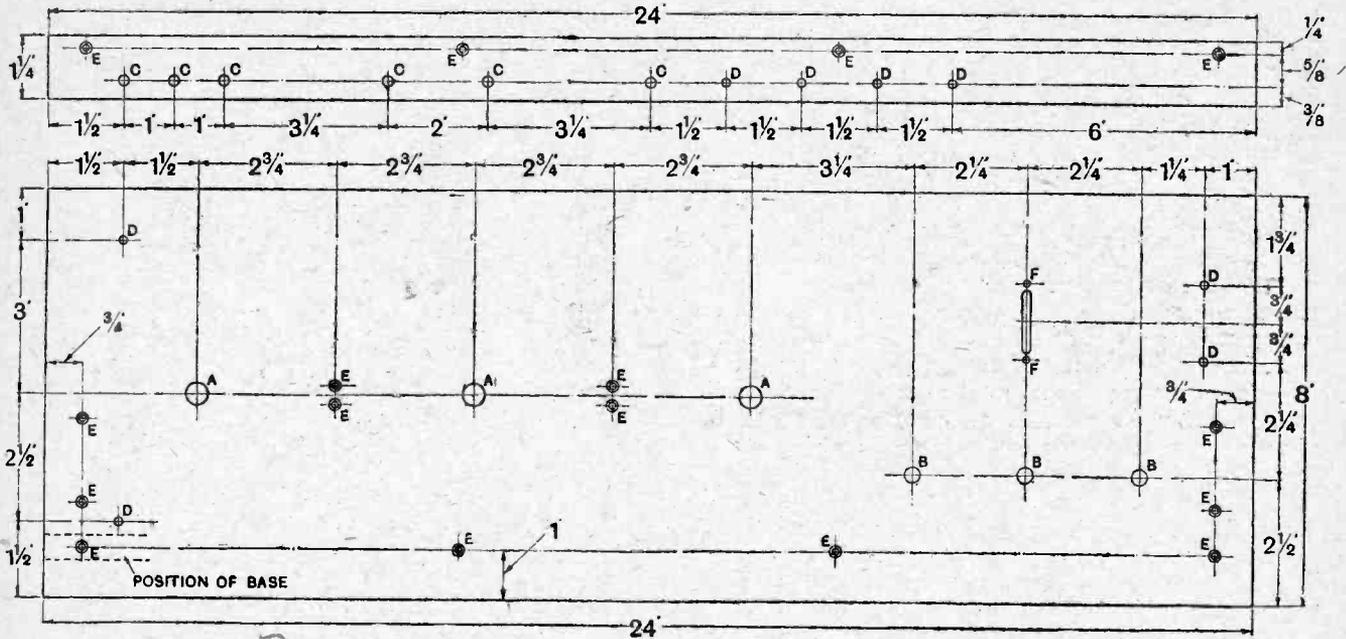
Drilling details of the front panel and terminal strip. A, 7/16in.; B, 5/16in.; C, 7/32in.; D, 5/32in.; E, 1/8in. and countersunk for 6BA and No. 4 wood screws; F, 1/8in. No tapped holes are required.
